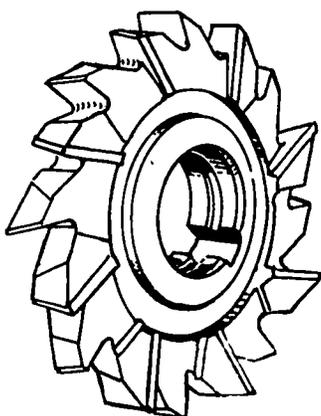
Staggered-tooth side milling cutter (National Twist Drill).
